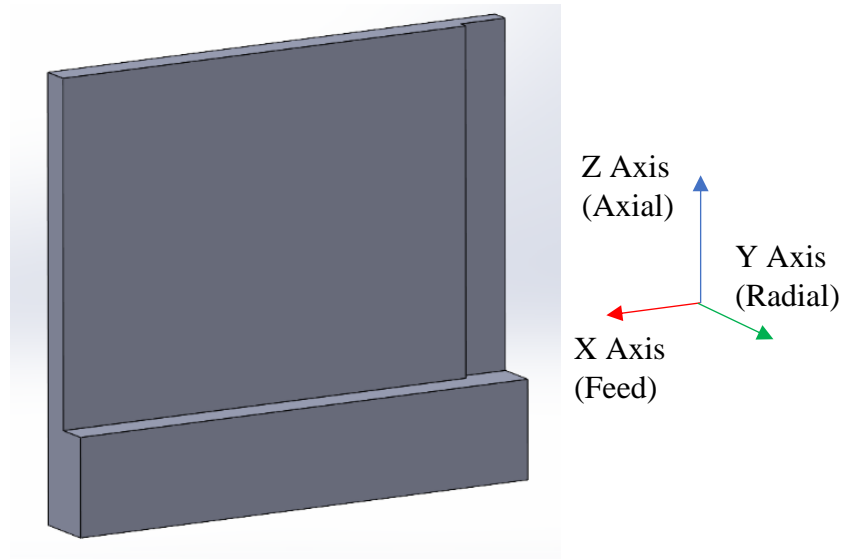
CAD model of 3 mm thick workpiece, undergoing 1 mm radial peripheral milling operation (5 mm of cutter engagement in feed direction)
